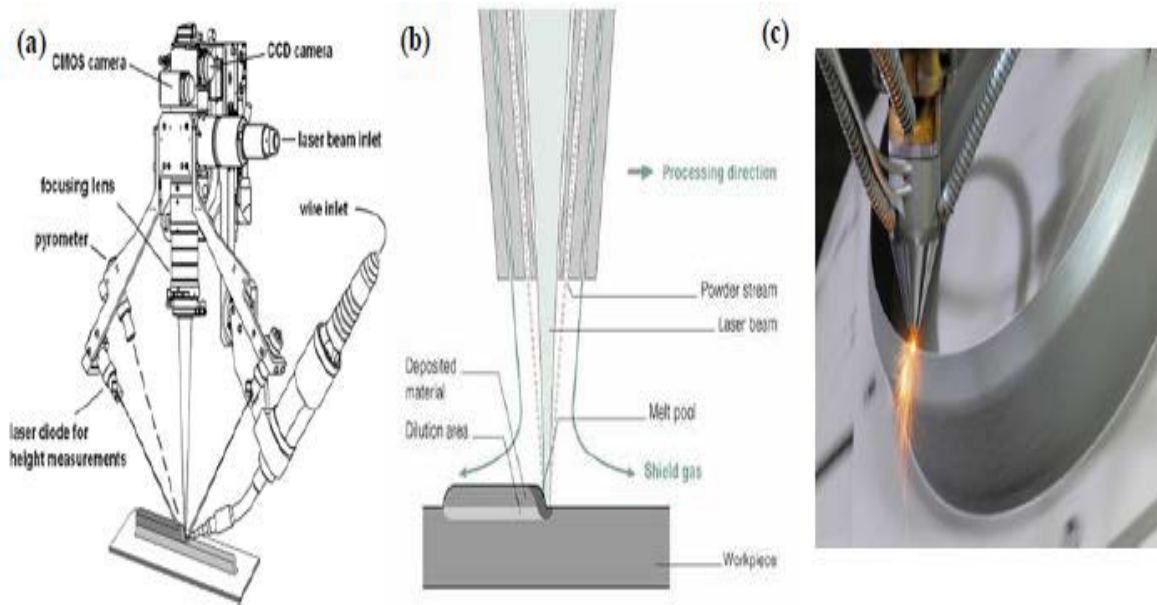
(a) Laser metal deposition with wire (LMD-w) concept (b) laser metal deposition with powder (LMD-p) (c) 5-axis manufacturing of the helicopter engine combustion casing [89]
